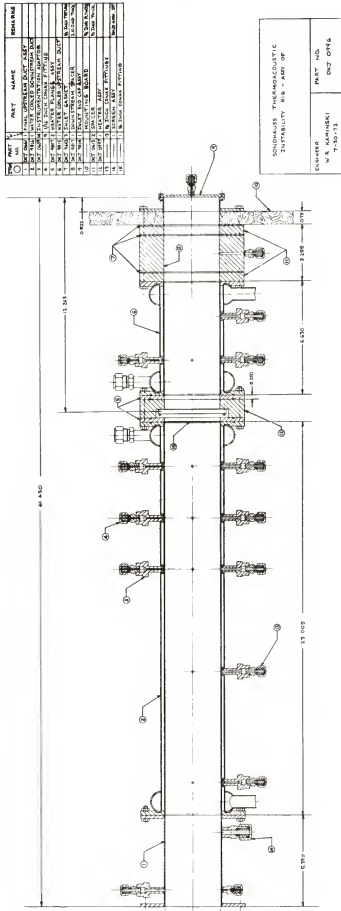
Sondhauss thermoacoustic instability rig assembly drawing.
